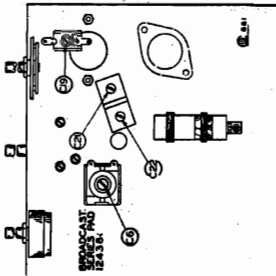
BOTTOM VIEW SHOWING TRIMMERS
